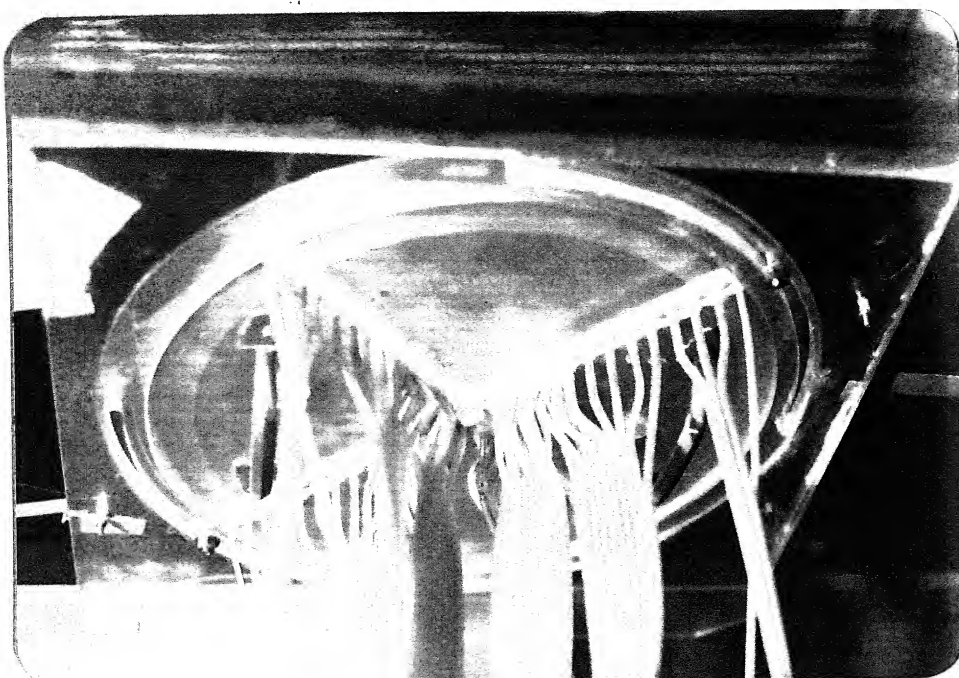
BOTTOM VIEW OF TURN TABLE ASSEMBLY IN
